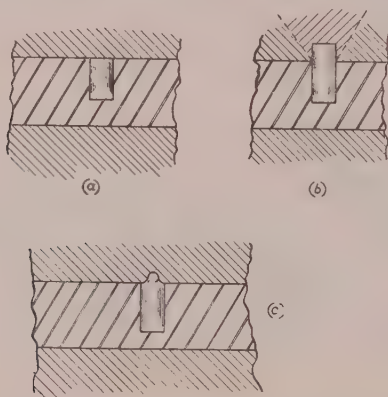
Methods of electroforming inserts in position, using disposable formers.
